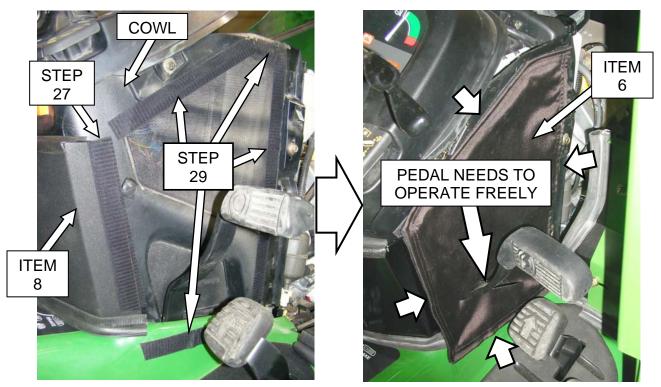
(SHOWN WITH VINYL COVER REMOVED)
